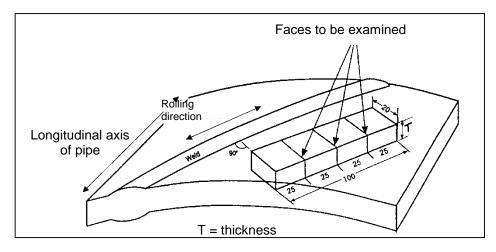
(a): Parent Metal of Spiral-Welded Pipe (All Dimensions in mm [1 in = 25.4 mm])
